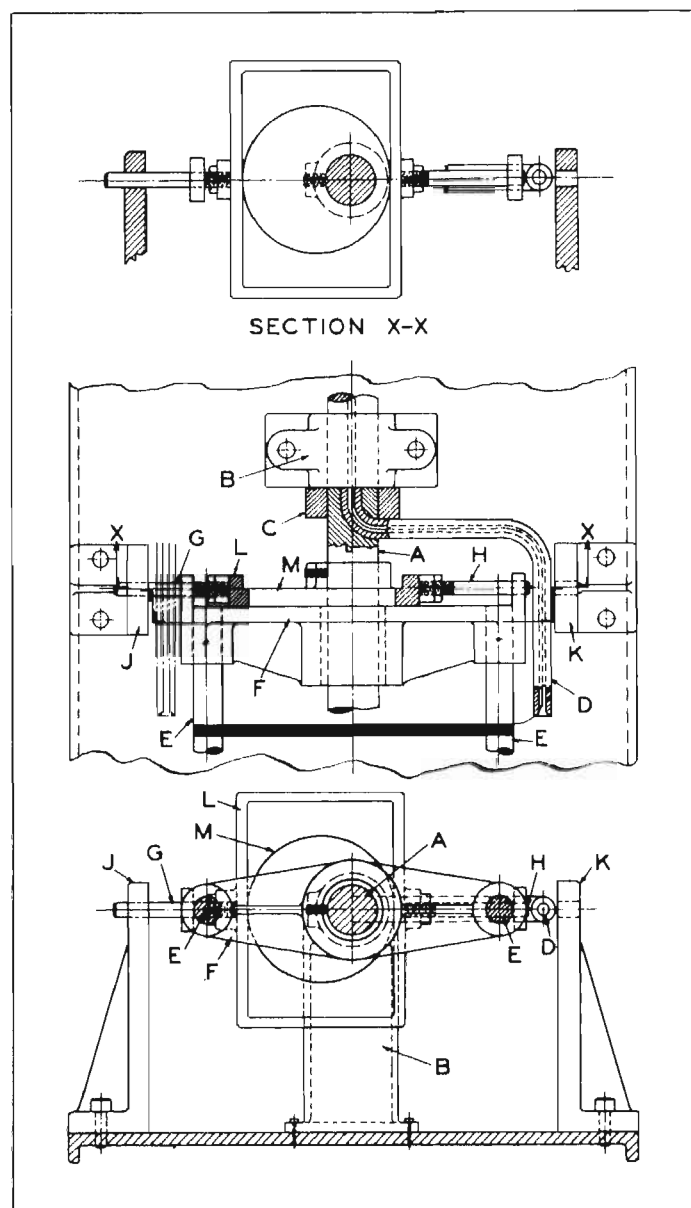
Head for skein-winding machine features Scotch yoke for reciprocating movable bracket-support pins.
